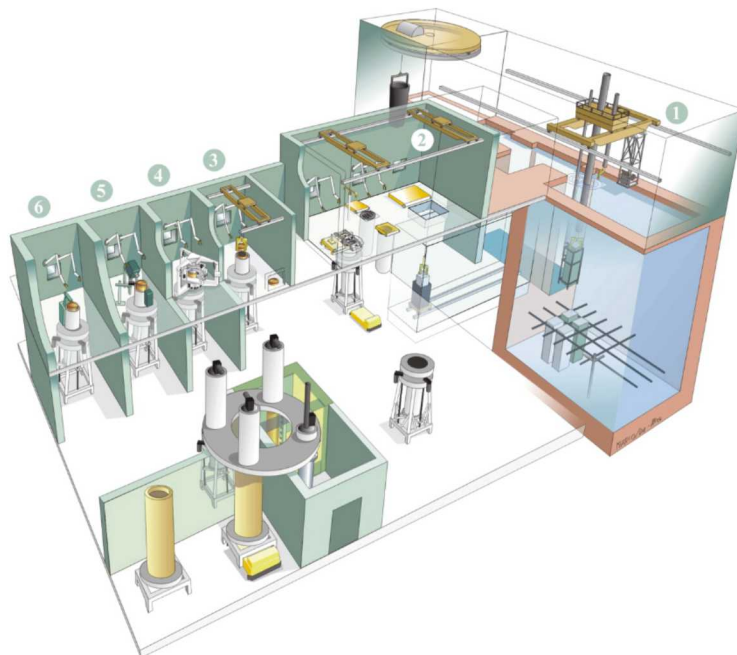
(1) Handling Pool, (2) Handling Cell, (3) Inerting, (4) Welding, (5) Non-destructive testing, (6) Machining [7]
